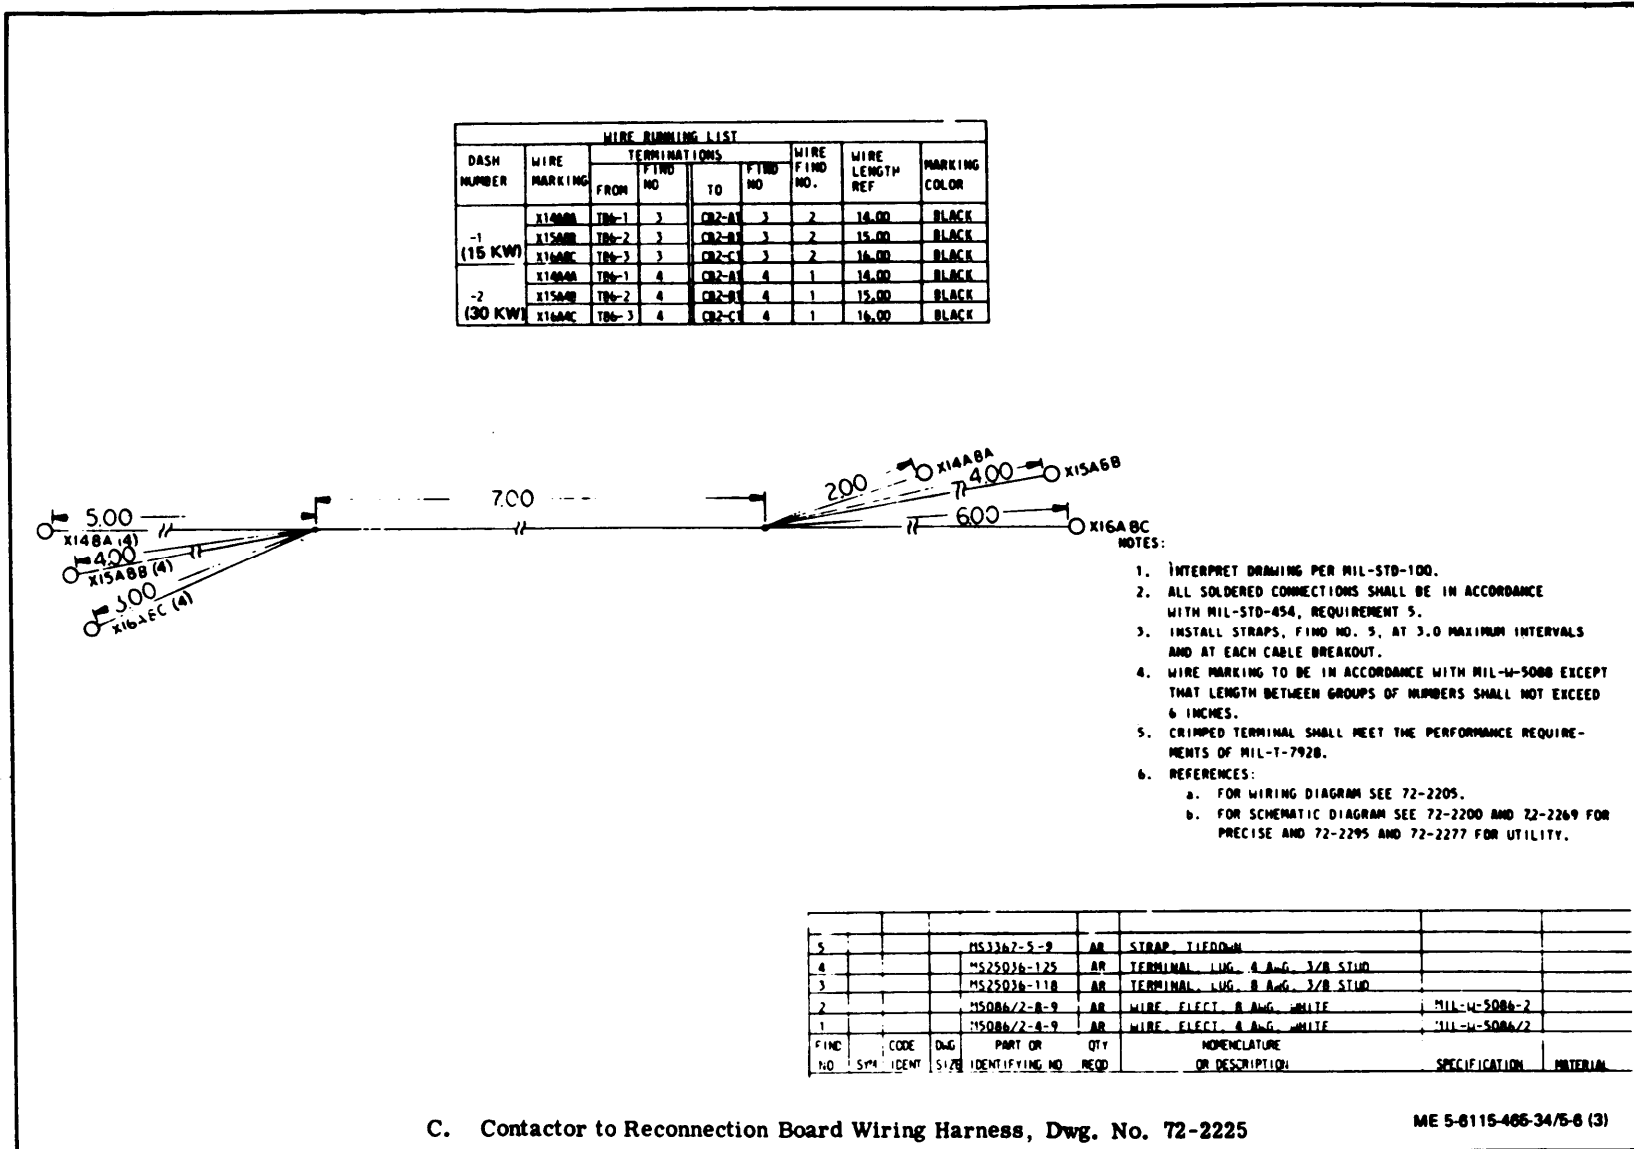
Main Load Contactor Schematic Diagram, Contactor to Load Terminals Wiring Harness, Dwg. No. 72-2290, and Contactor to Reconnection Board Wiring Harness, Dwg. No. 72-2225 (Sheet 3 of 3)
